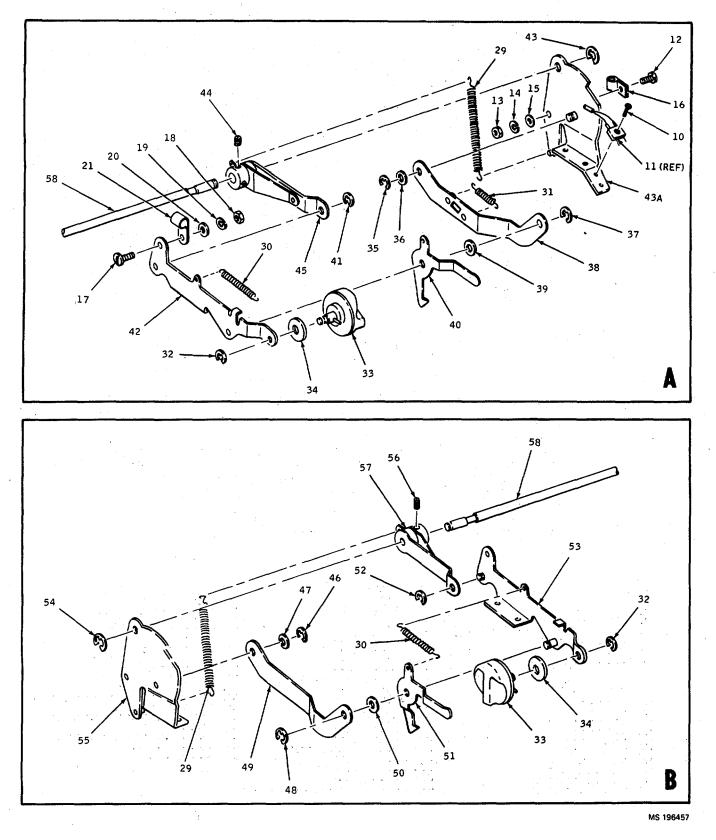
Cover Assembly, Exploded View (Sheet 2 of 2)
